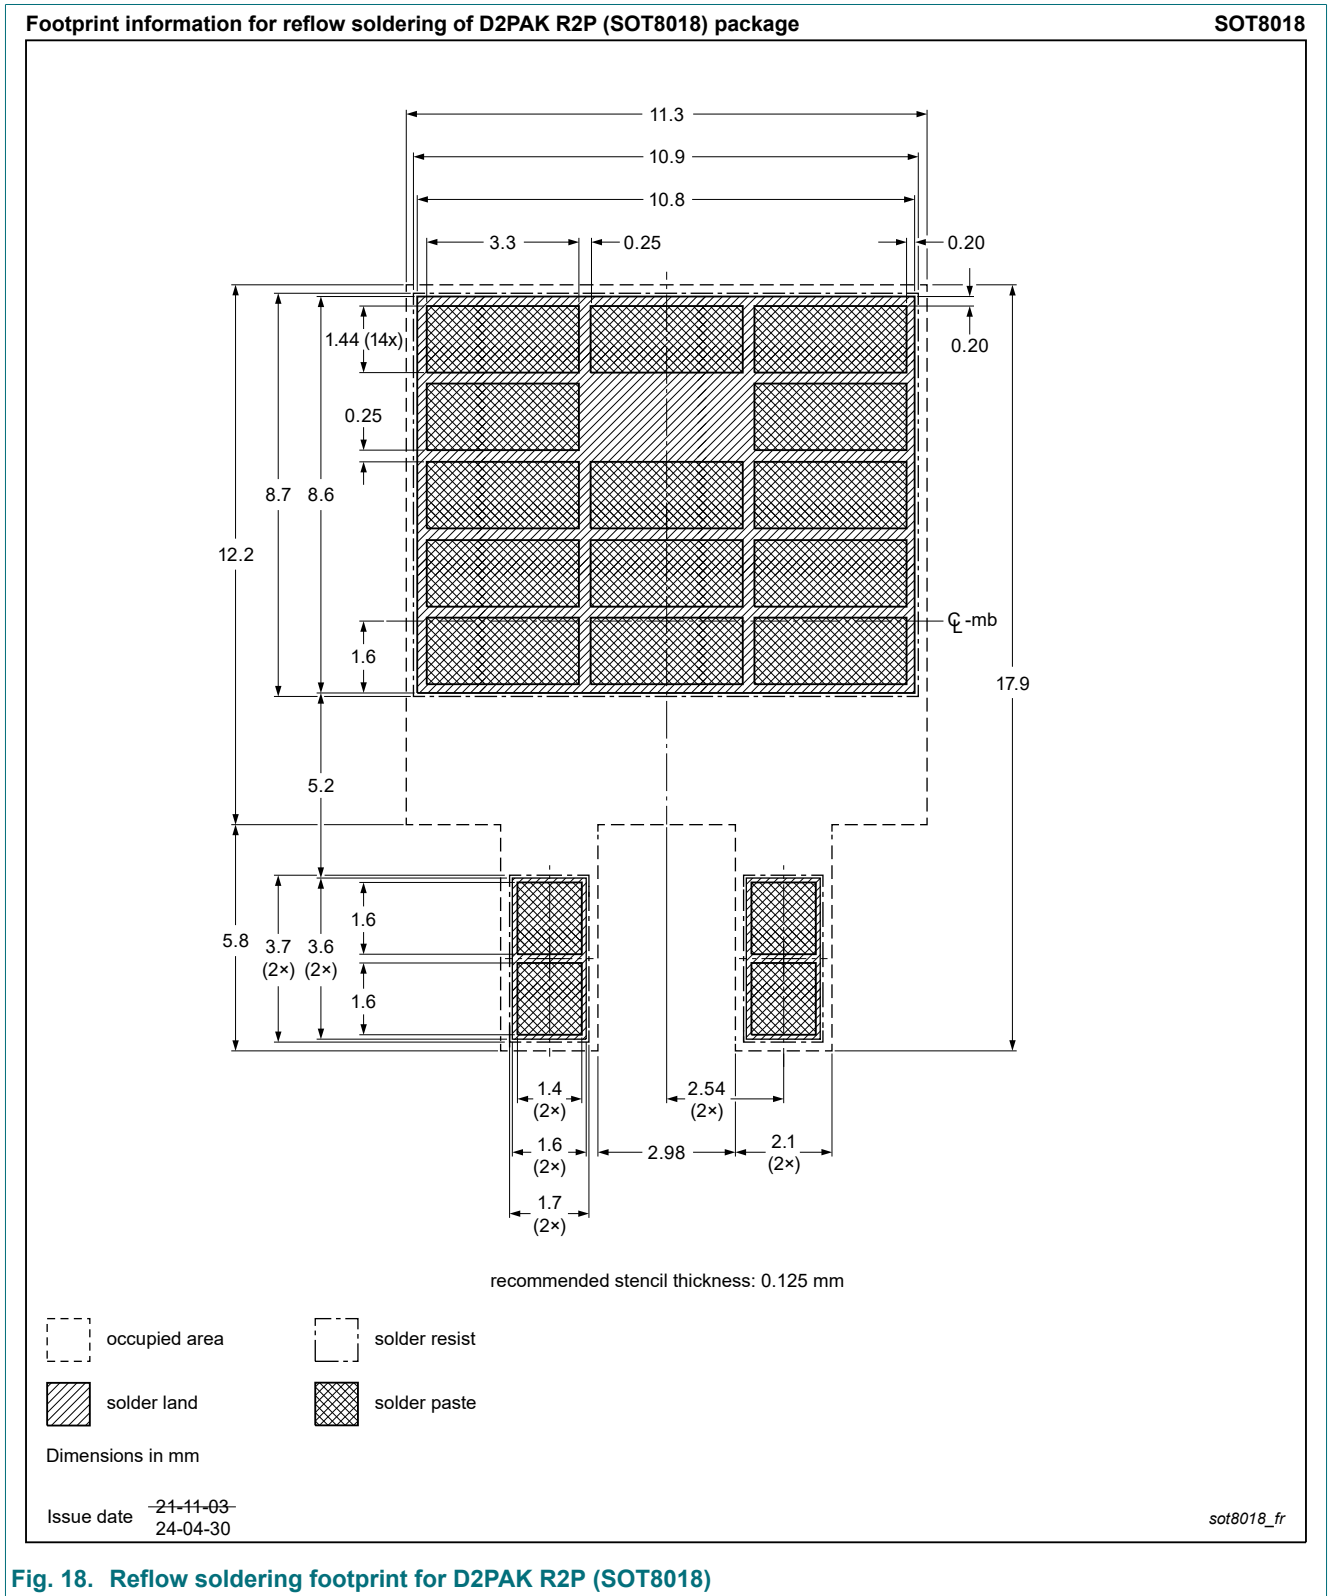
Reflow soldering footprint for D2PAK R2P (SOT8018)
